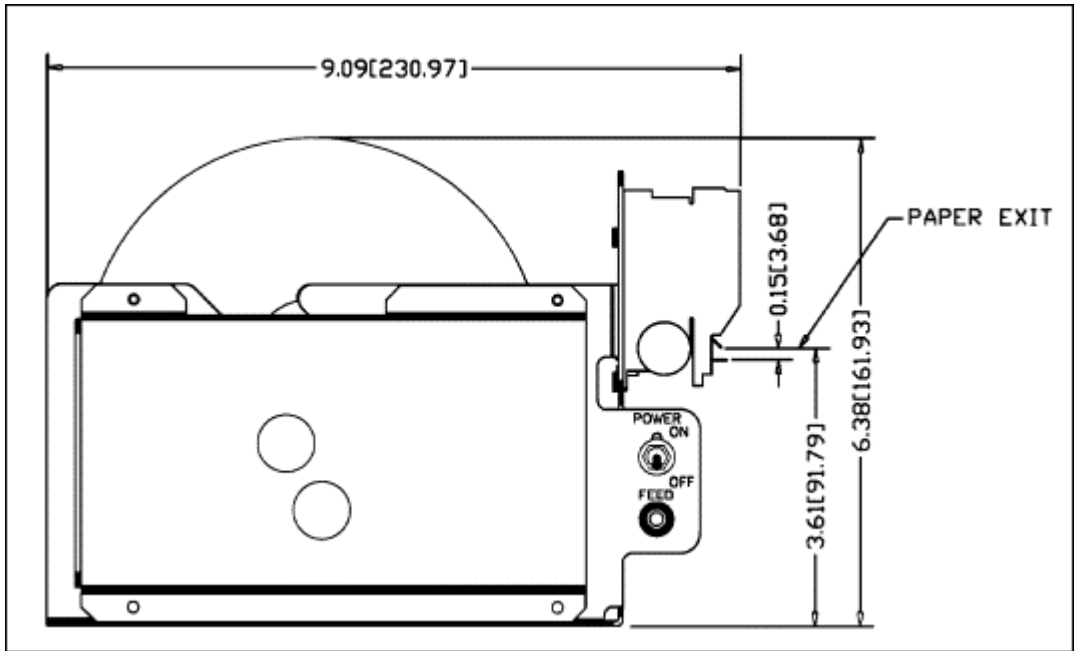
MTP-2232/MTP-2242 Dimensional Drawing (Side View)
